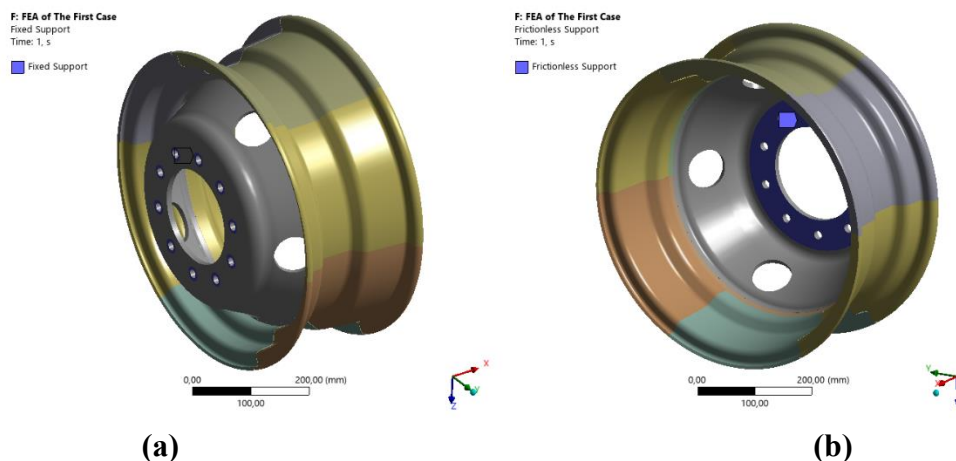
Wheel connection to vehicle: (a) Nut mount faces (fixed supports), (b) Hub mount face (frictionless support)
